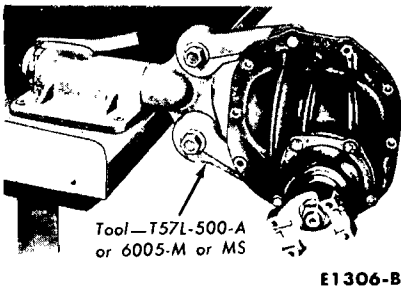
Bench Fixture for Carrier Overhaul—Removable Carrier Type Axle
